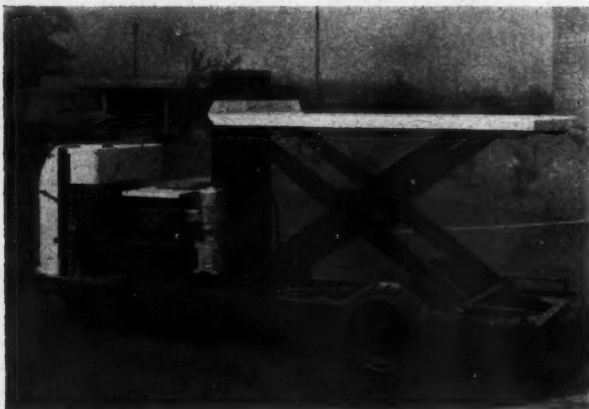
Close-up view of the Bore-Matic machine for roughing operations on fan sections of motor housings, showing the clamping arrangements and tooling
